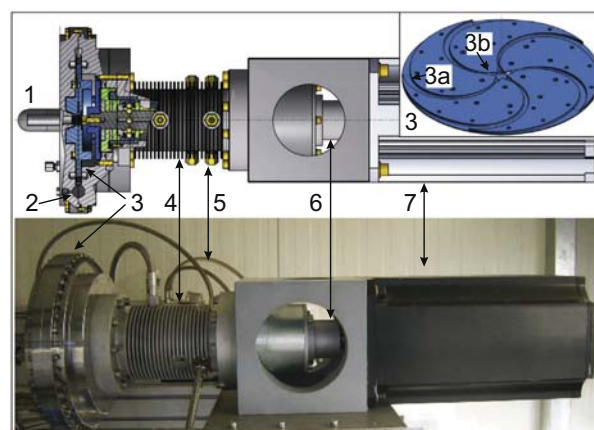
Centrifugal radial turbine with two angular ball bearings and a magnetic coupling to the generator: (1) axial steam inlet; (2) steam outlet; (3) blade wheel; (3a) blade channel; (3b) laval nozzle; (4) shaft bearing; (5) cooling and lubrication cycle; (6) magnetic coupling; (7) generator.
